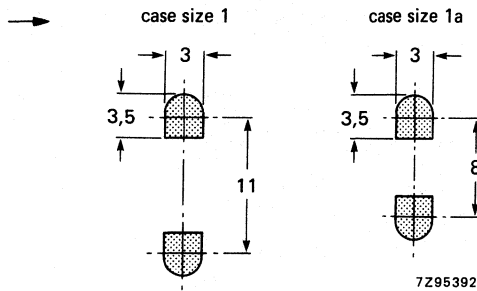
Recommended dimensions of metal connection pads on printed-circuit board for wave soldering.
